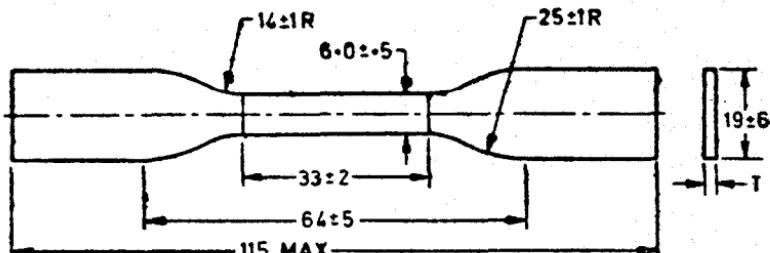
TENSION TEST SPECIMENS FOR SHEET, PLATES AND MOULDED PLASTICS
